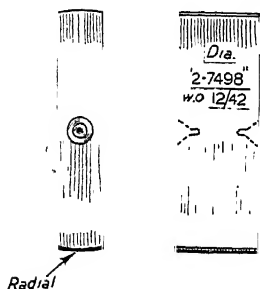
"Master" diameter standard for setting of thread-diameter measuring machine.
